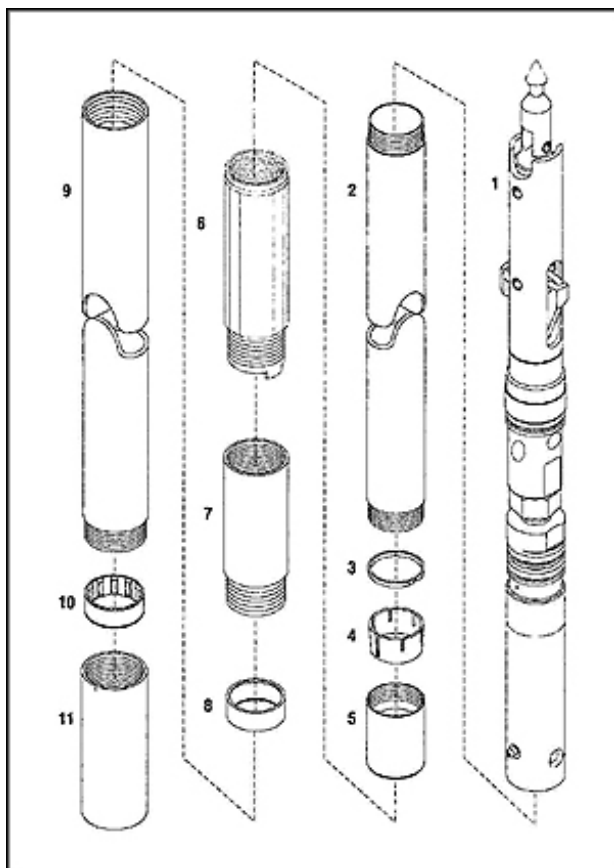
1 – bearing unit; 2 – internal core barrel; 3 – locking ring of core breaker; 4 – core breaker ring; 5 – core-catcher adapter; 6 – special passage; 7 – reducing coupling; 8 – supporting ring; 9 – outside pipe; 10 – stabilizer of internal pipe; 11 – core bit
